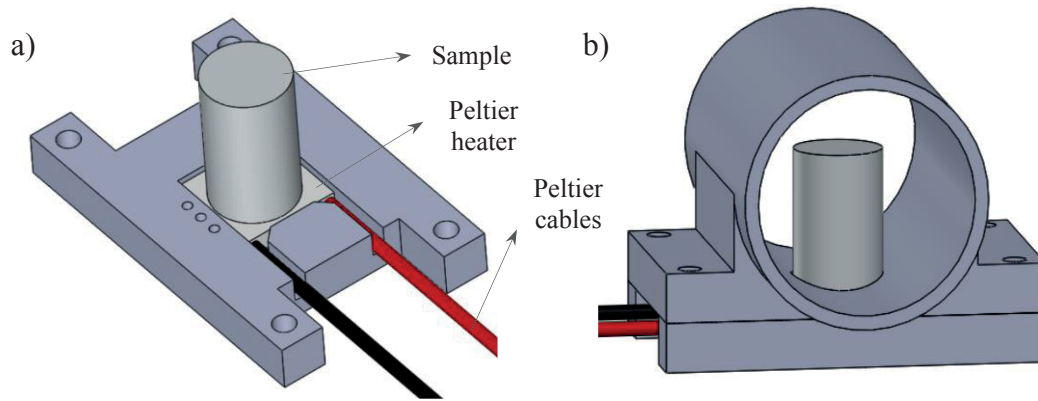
3D models of the sample holder: a) bottom part b) final assembly
